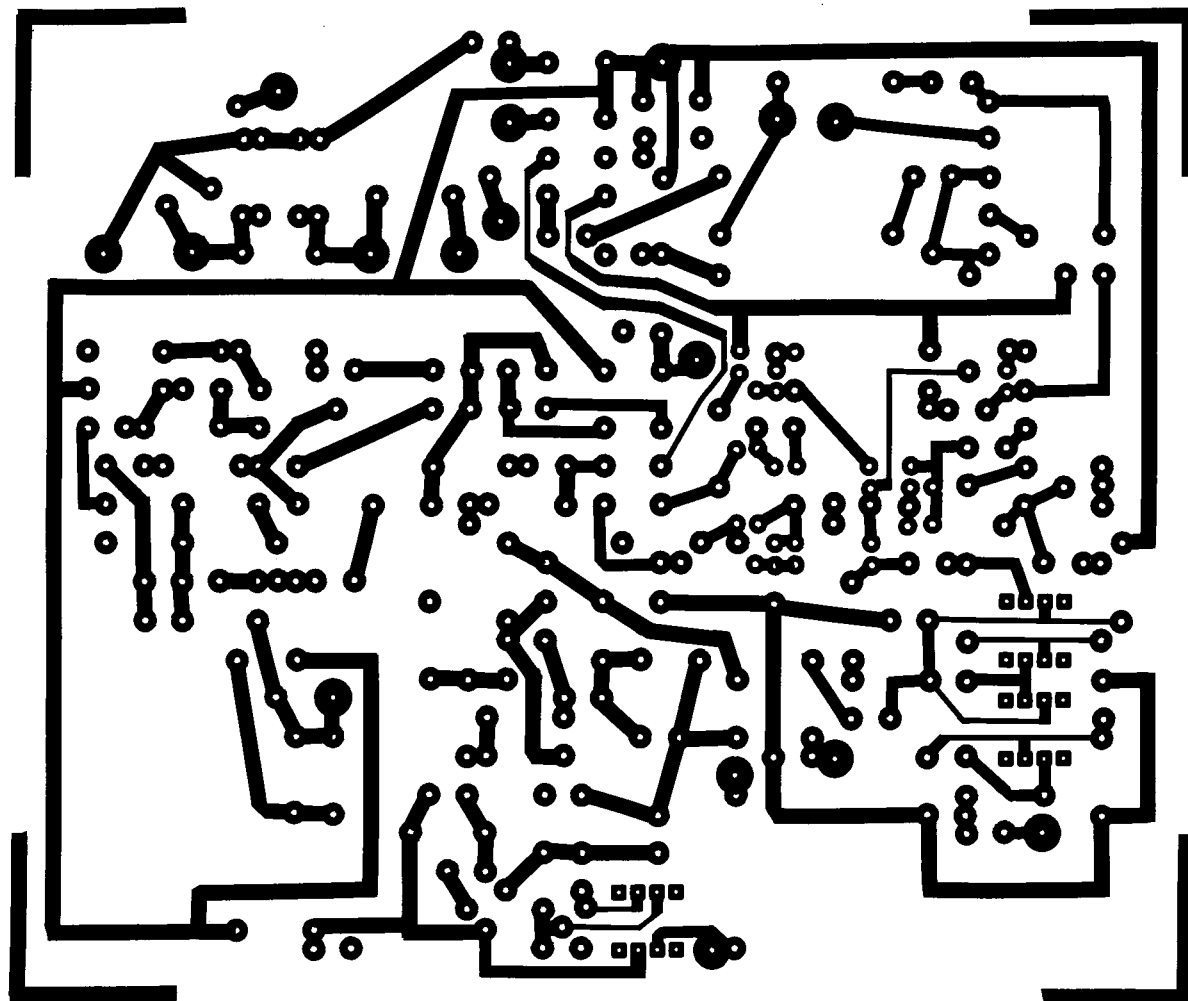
1.8MHz QRP transceiver PCB layout
